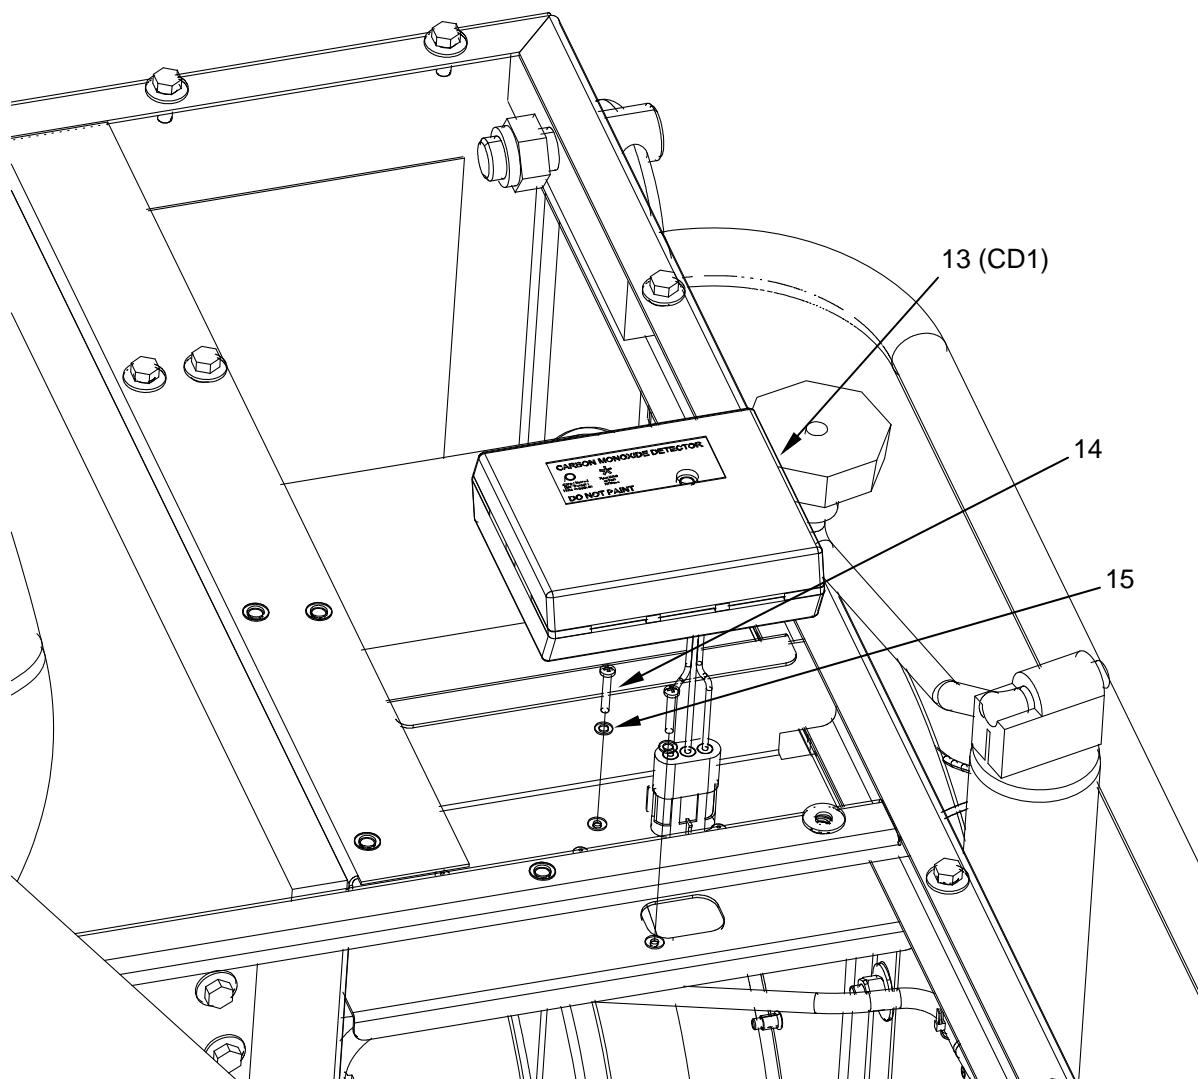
CO Detector, Cabinet Mounted (Sheet 4 of 8).
